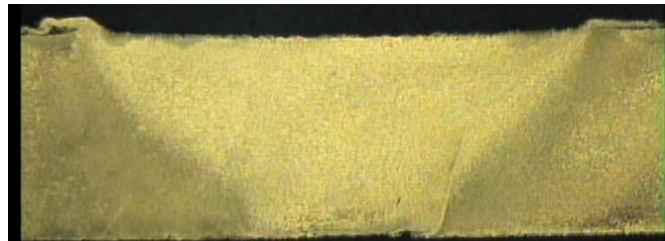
Cross section of a weld seam, example 1.
